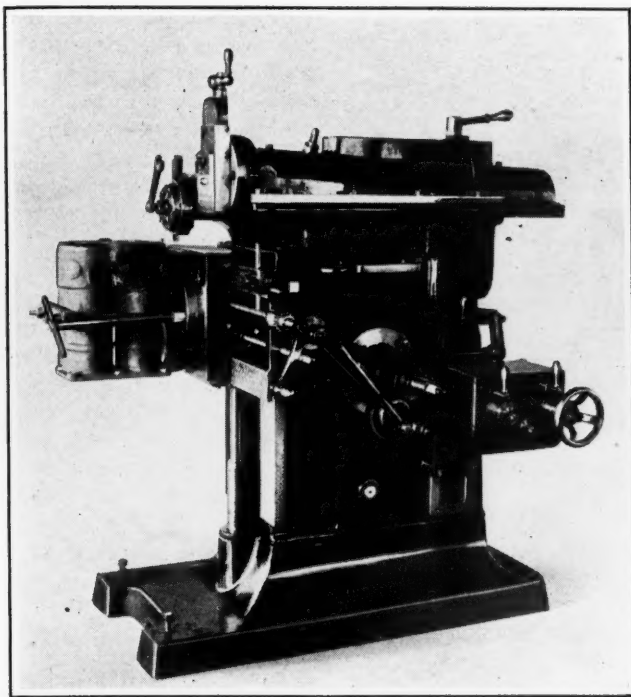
Equipment used for machining the End of an Automobile Cylinder Block on a Shaper
